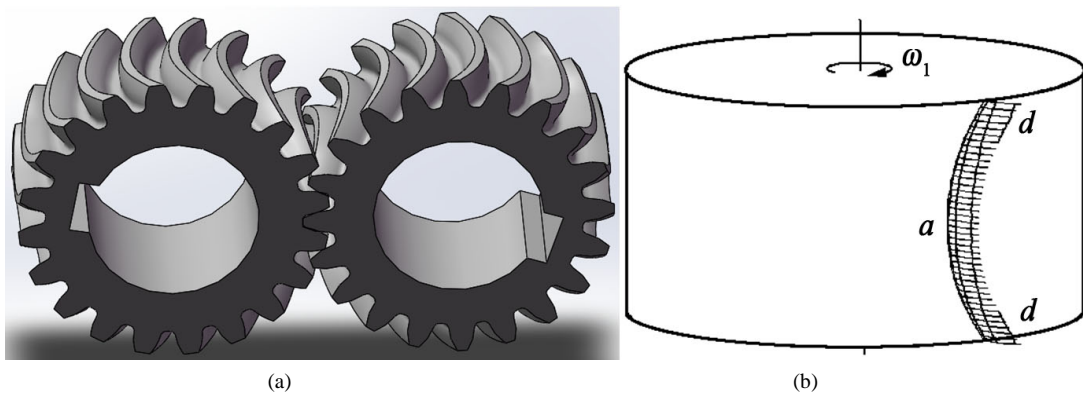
The meshing of involute arc cylindrical gears: (a) The gear pair meshing station; (b) The contact lines of tooth surface
